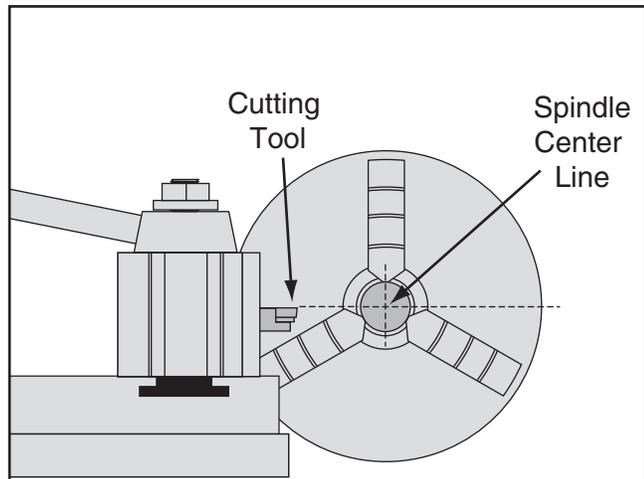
Cutting tool aligned with spindle centerline (viewed from tailstock).
